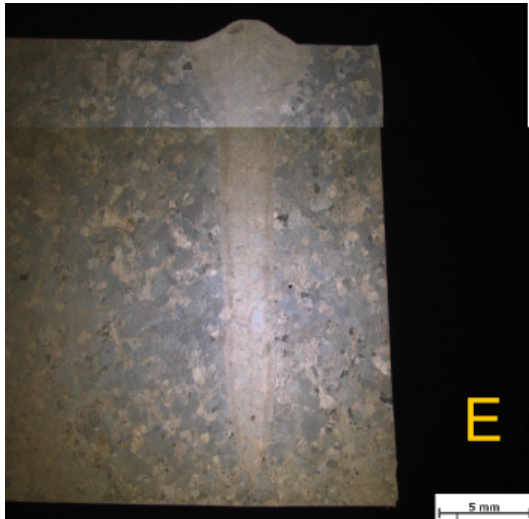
WTP,blind weld E [Adler]: cross-section, no pores and not fully penetrating, the overall quality is adequate, regular weld bead
